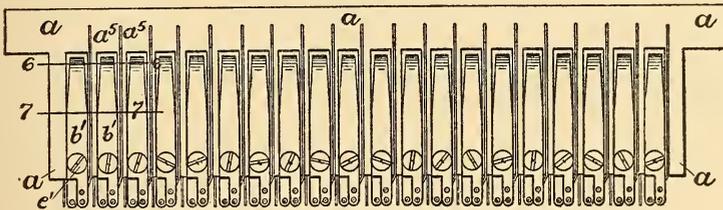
PLAN VIEW OF MULTIPLE JACK STRIP.
